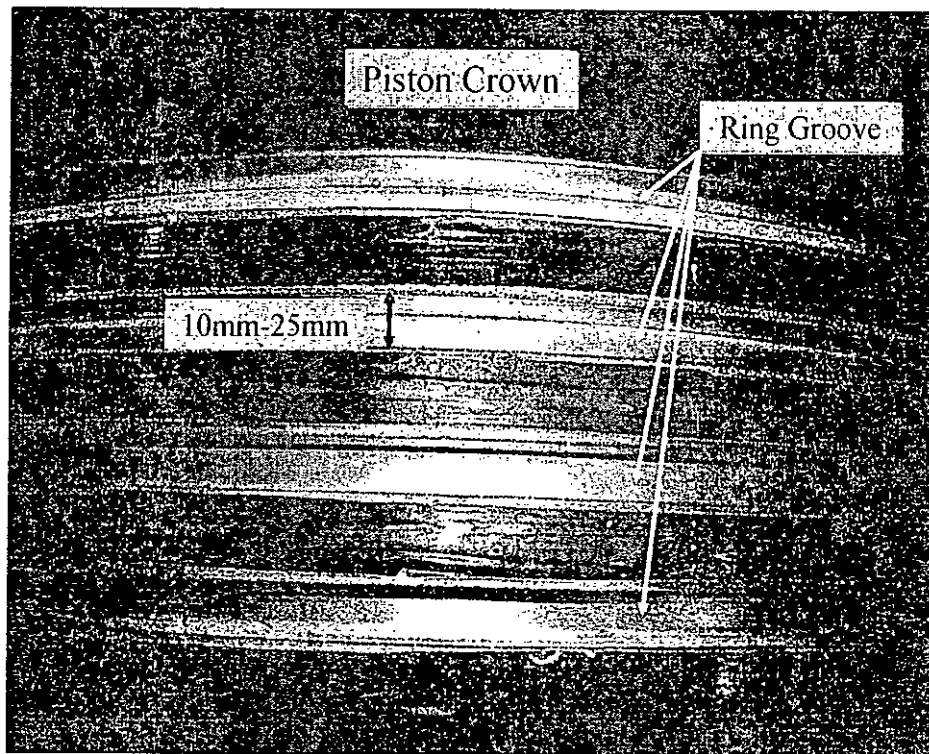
A photo shows the appearance and dimension of the piston crown ring grooves
